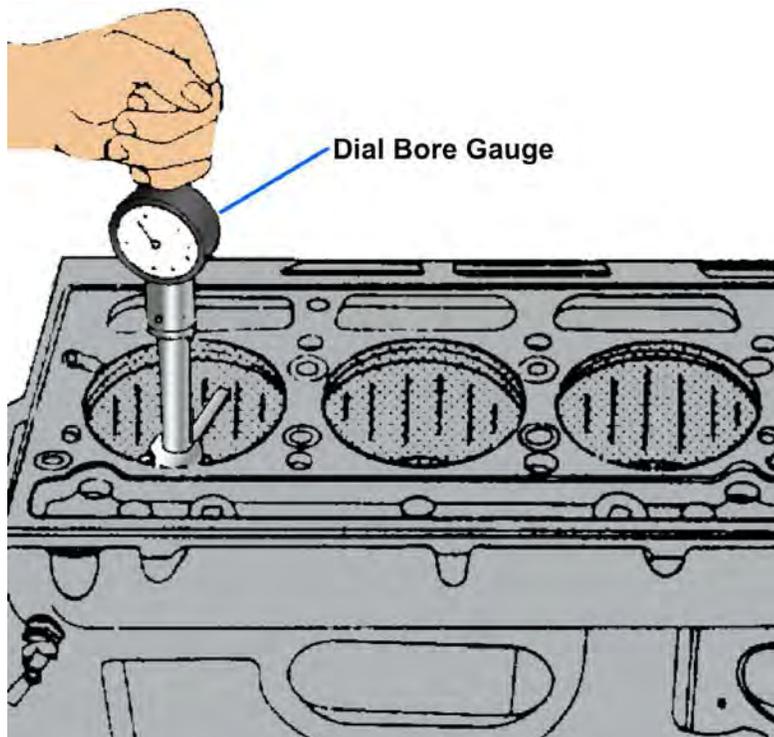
Checking the cylinder bore for wear or out-of-roundness.
